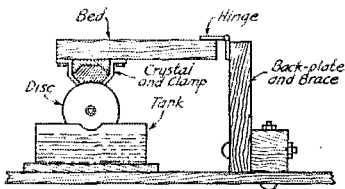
THE CRYSTAL-CUTTING RIG OR "MUCK SAW"
